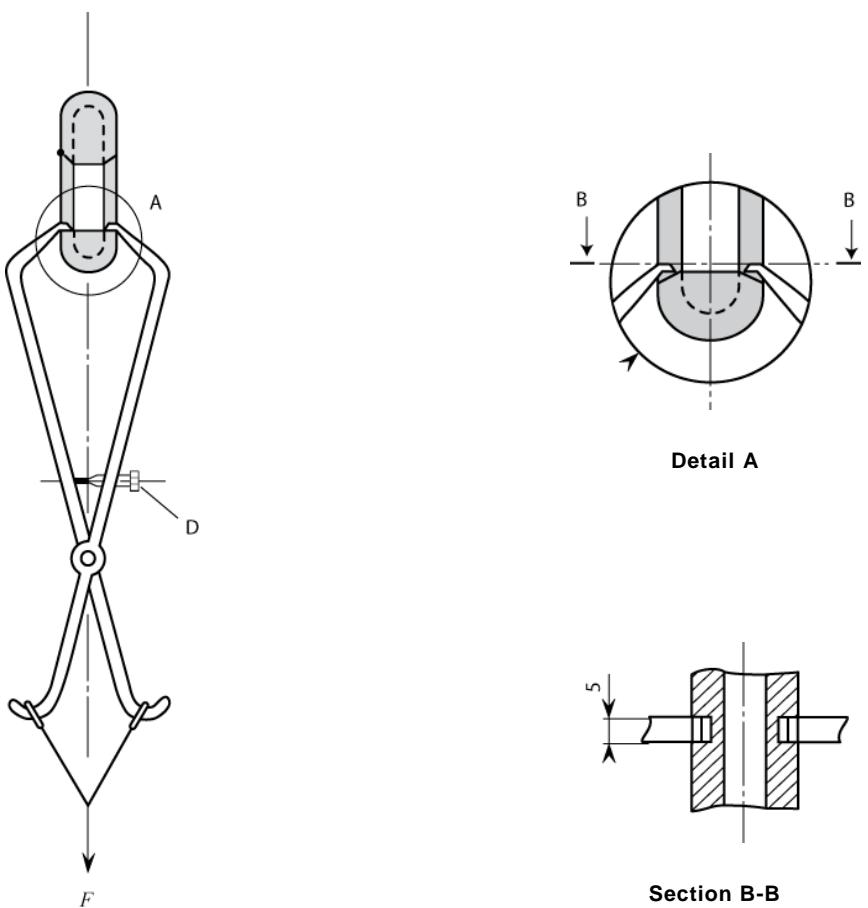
Principle of the testing device for checking adhesion of the insulating coating on conductive parts of the insulated hand tools – Test on the working head – Method A
